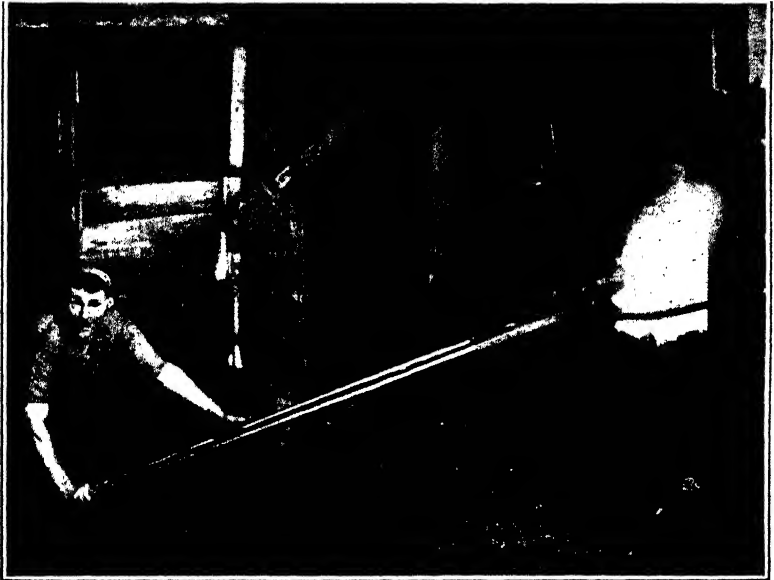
Removing the puddle ball. (Courtesy of Youngstown Sheet and Tube Co.)
